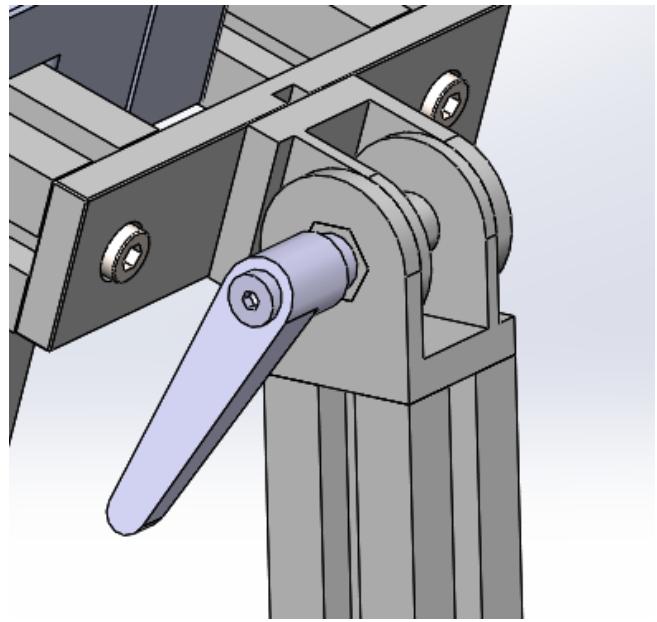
Pivot joint at the head angle setting on the welding-jig
